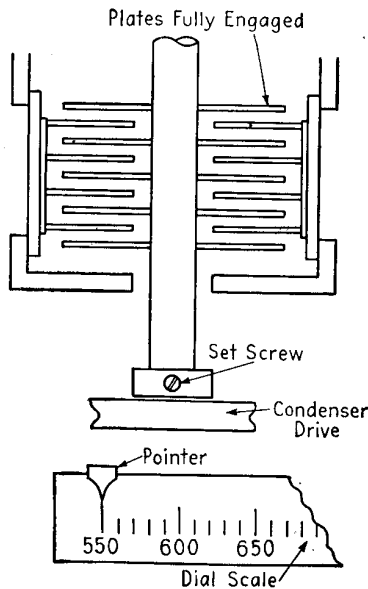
Position of condenser drive, setscrew, and dial pointer.
